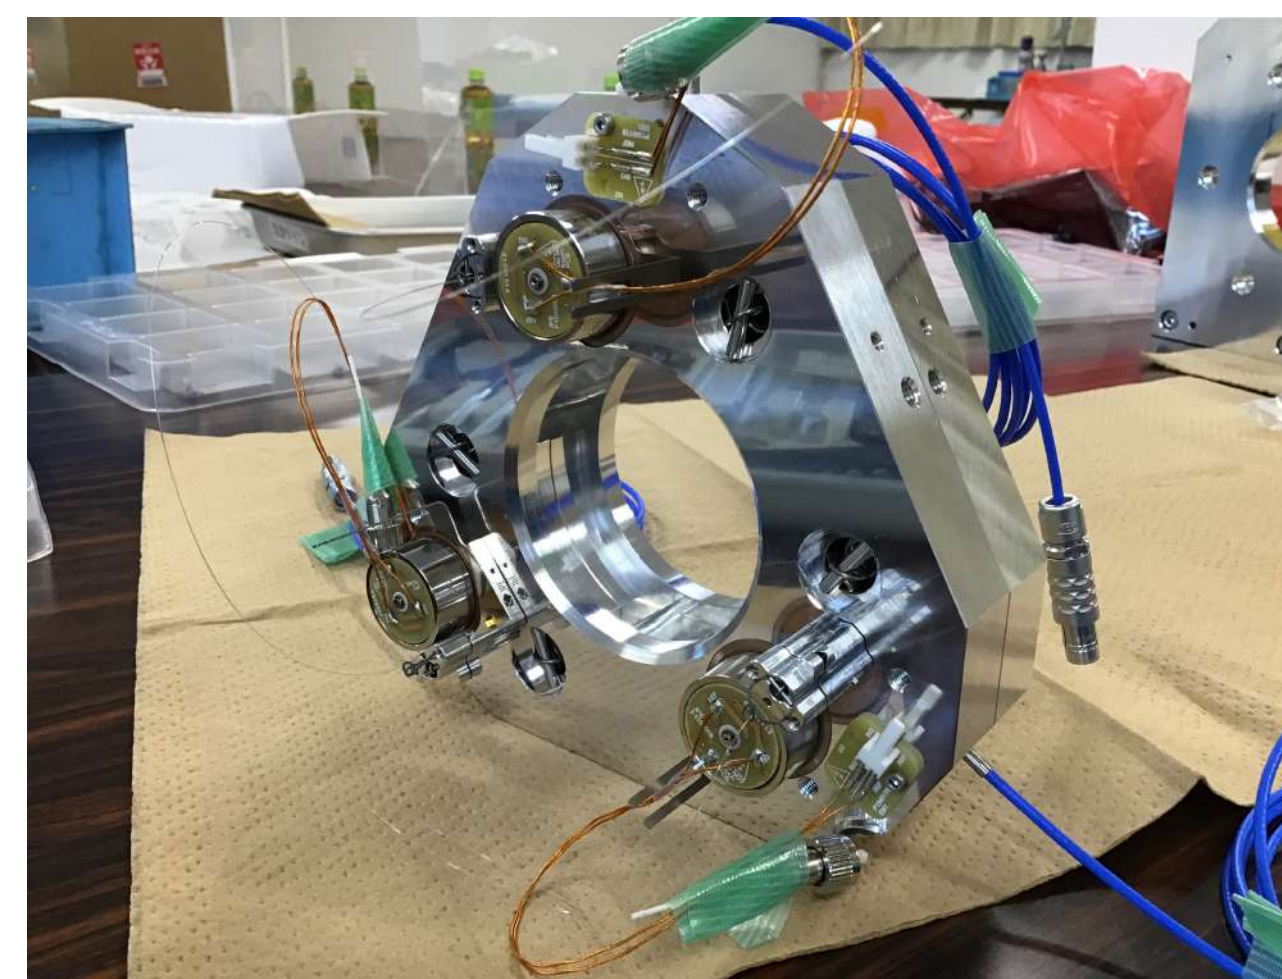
Aluminum housing with each component mounted. 3-dimensional surface control can be done.
